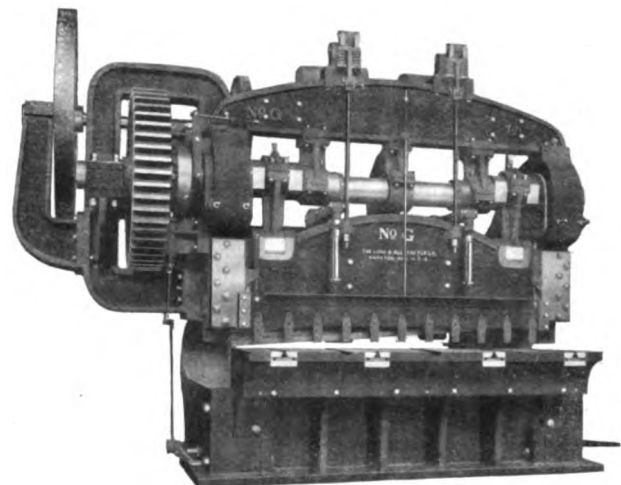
No. G Gate Shear, 122 Inches Wide Between Housings
